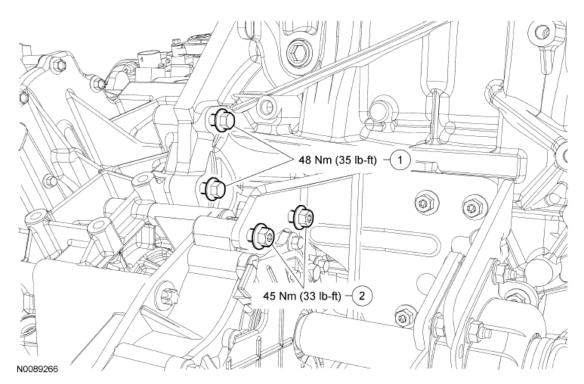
Identifying Bellhousing-To-Engine Bolts Courtesy of FORD MOTOR CO.
